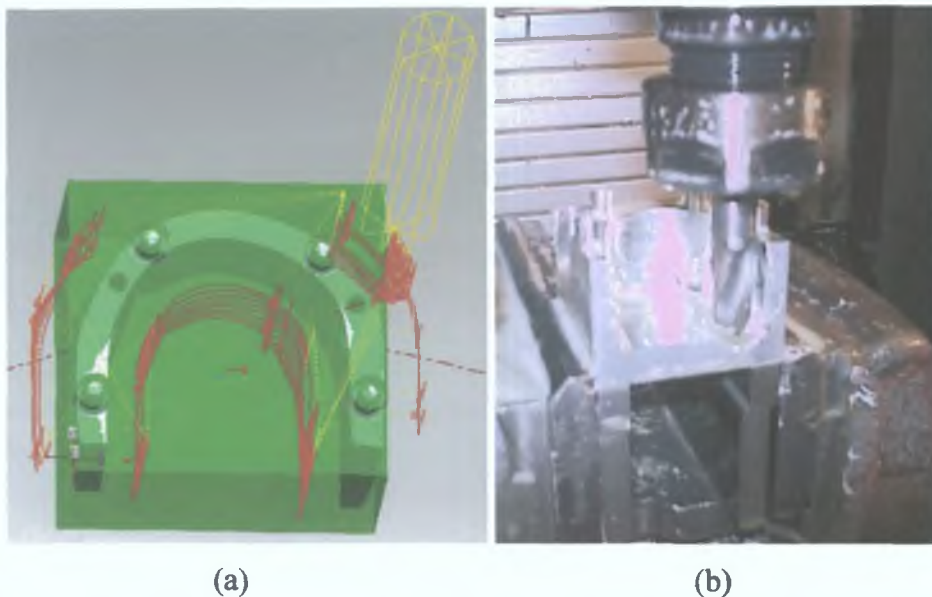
Profile Mill Sequence 1. (a) ProEngineer Tool Path. (b) Machined Work Piece.
